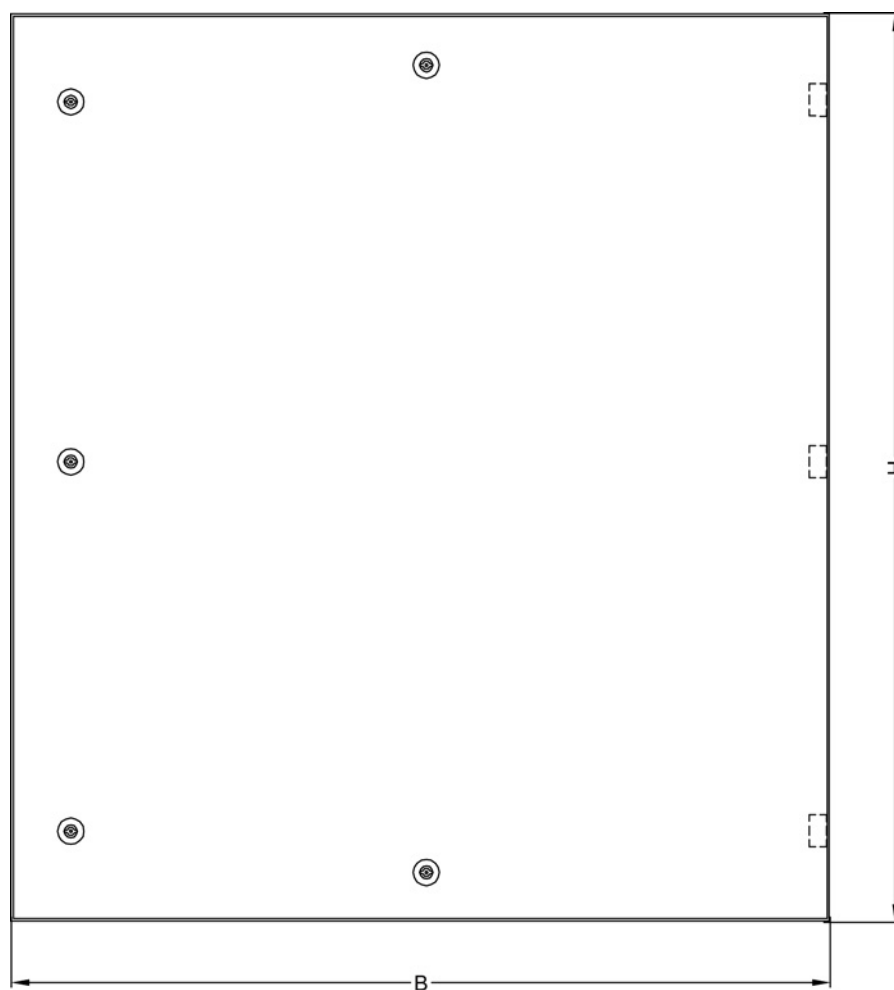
Standard enclosure 6DL2804-0xH...Wxx, view 1
